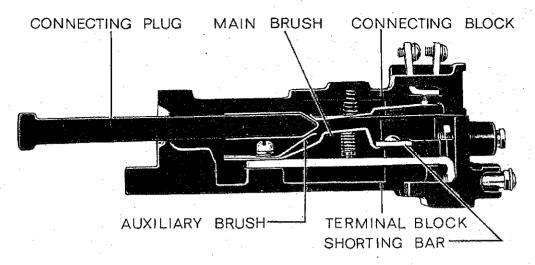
(8025039) Cross Section Of Drawout Case Showing Position Of Auxiliary
